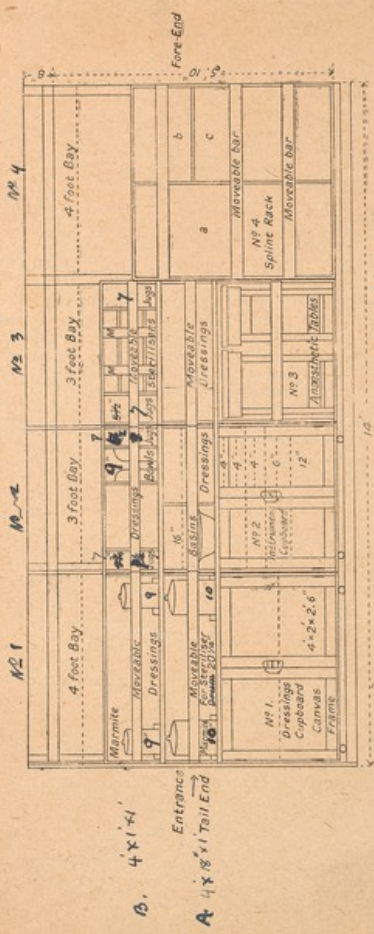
Longitudinal section showing details of furniture of left-hand side. (Compare photograph, fig. 3.) Scale 3/4 inch to the foot.
